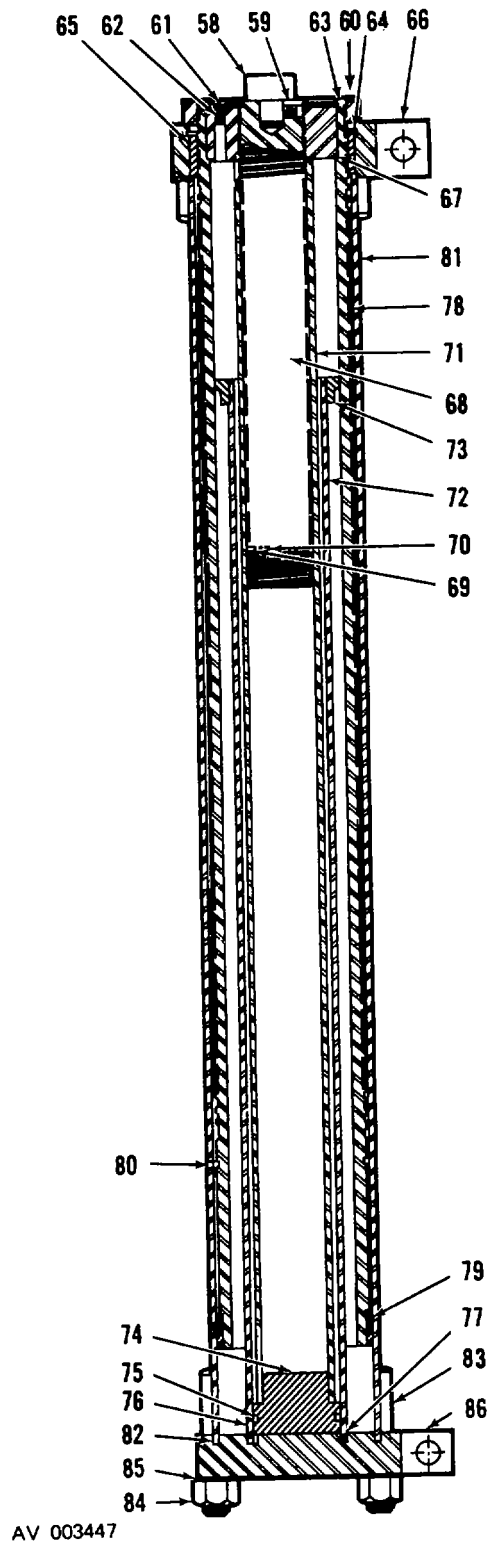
Part No. 986CS, 25-Ton Hydraulic Tripod Jack, Exploded View (Sheet 3 of 3).
